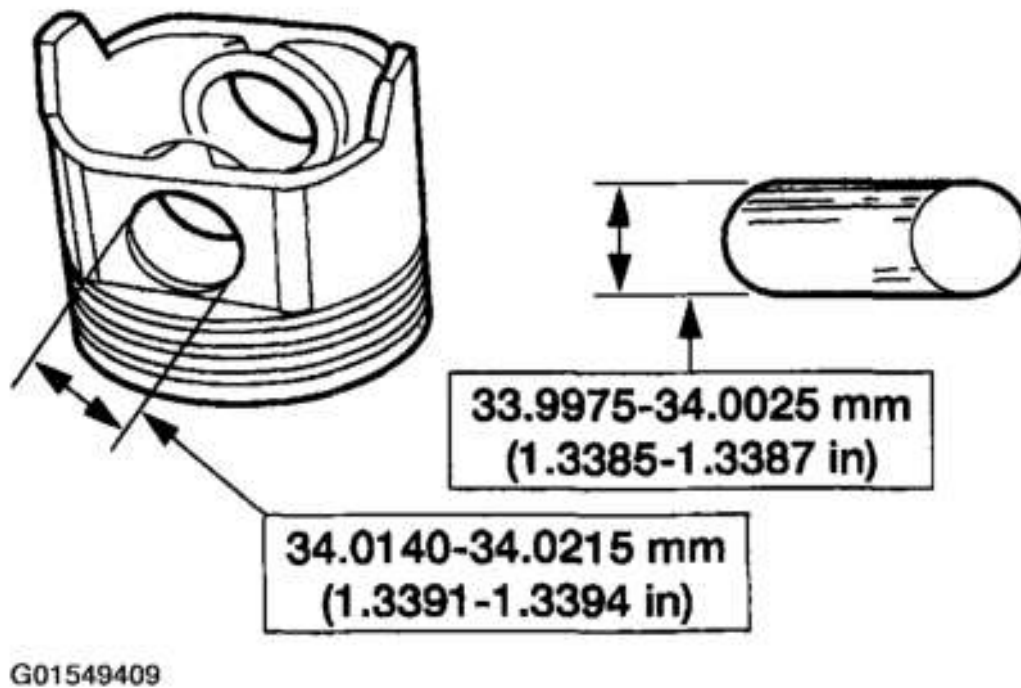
Measuring Piston Pin-To-Bore Clearance
